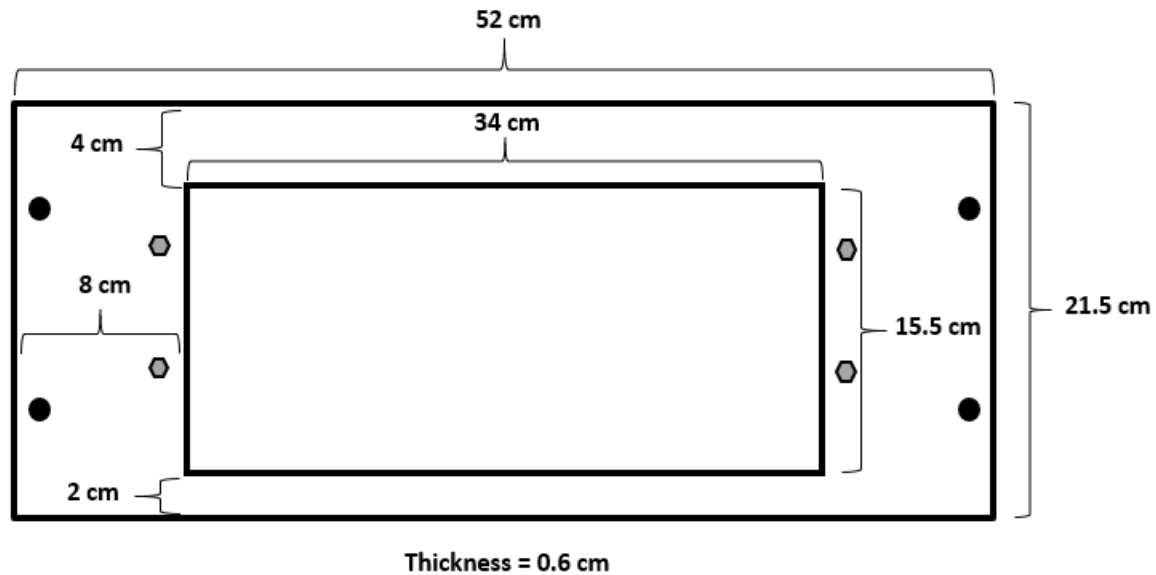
Box faceplate dimensions and modifications. Faceplate used on boxes is made from 0.3 cm plastic board. See section 2.2
